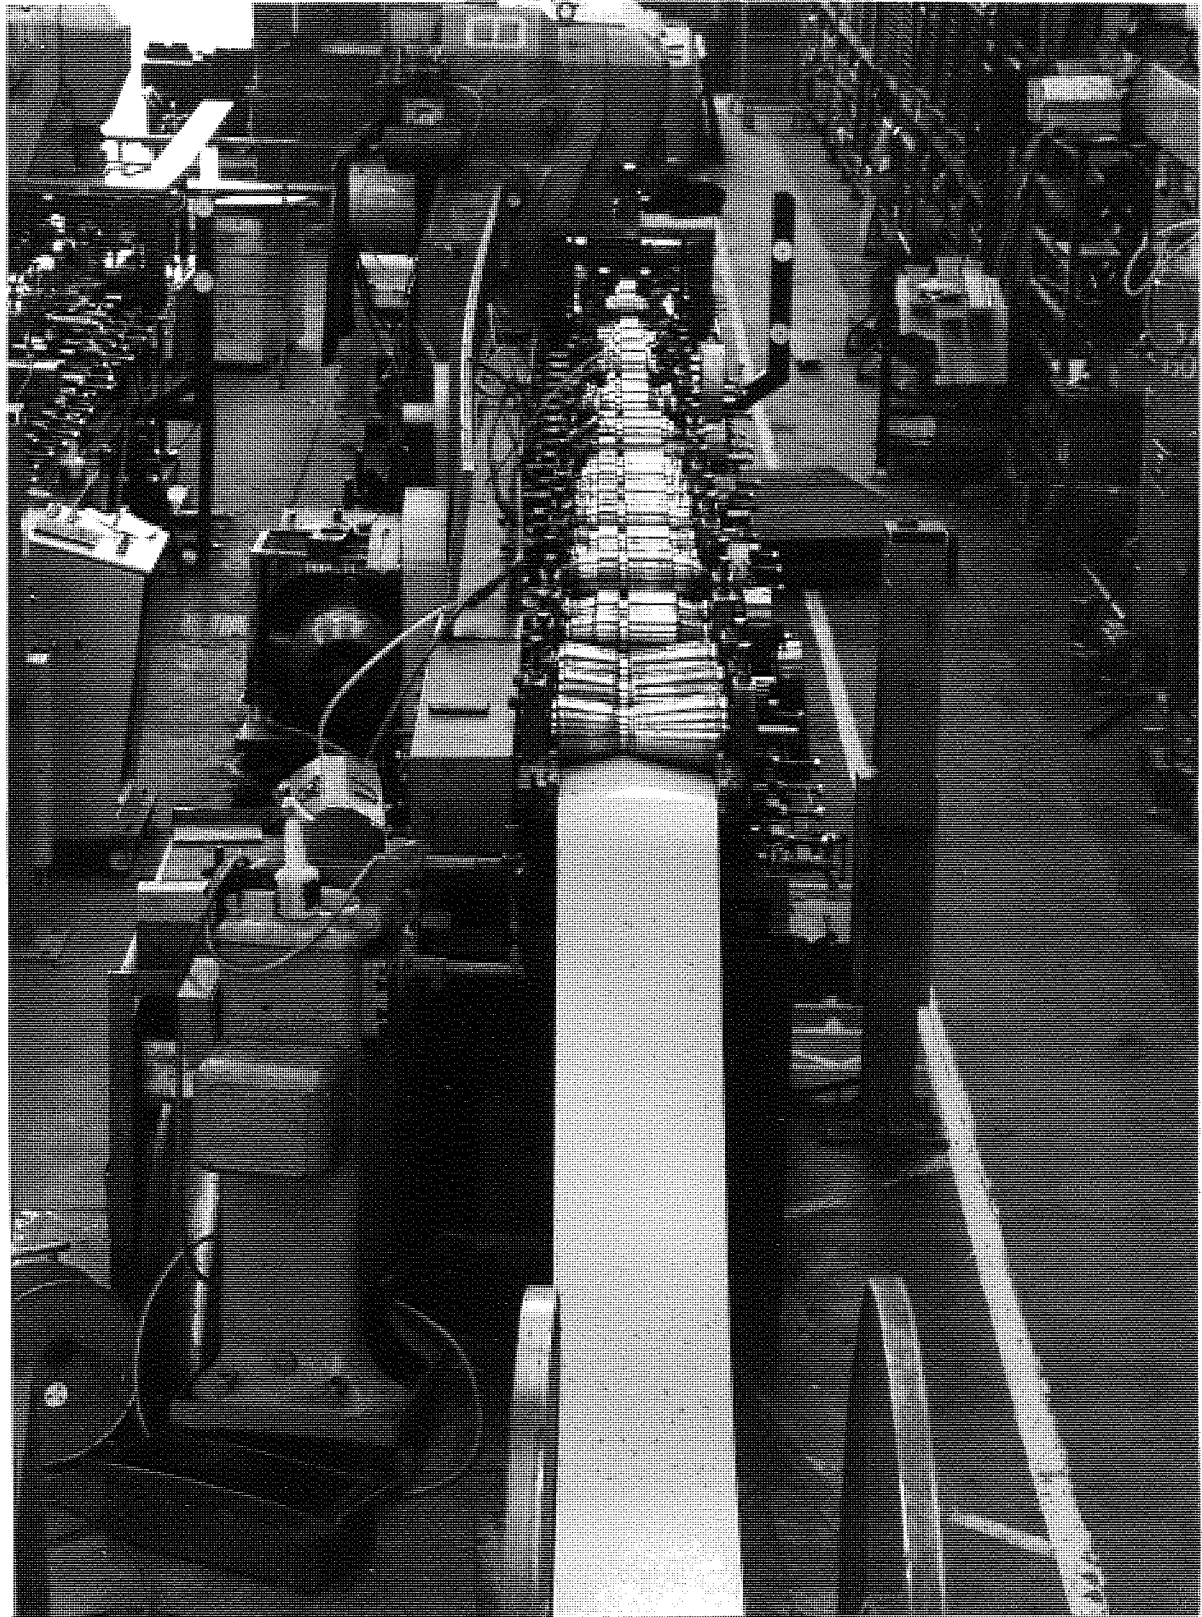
A TYPICAL ROLL FORMING MACHINE
